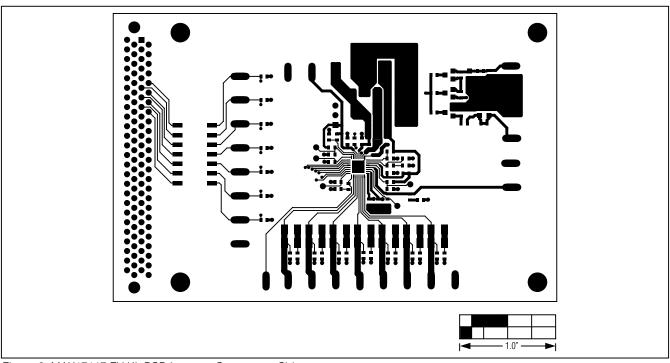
MAX17117 EV Kit PCB Layout—Component Side
